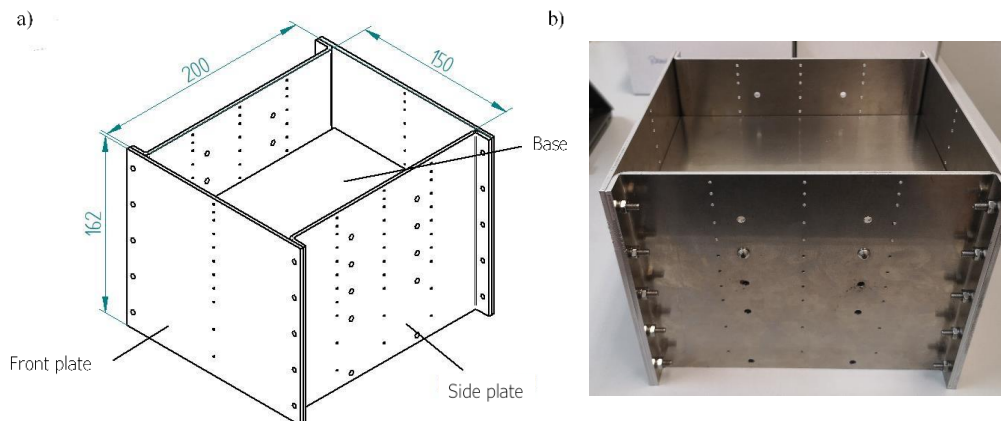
Aggregates' receiver a) Design dimensions in mm, b) Real constructed design.
